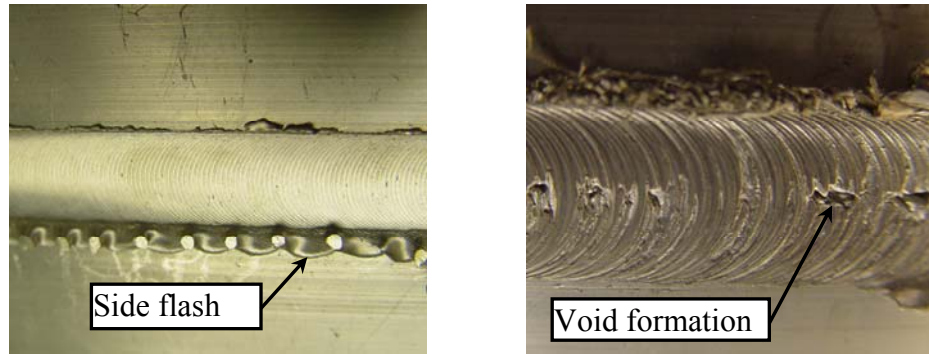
Typical welding defects of excessive side flash and void formation
